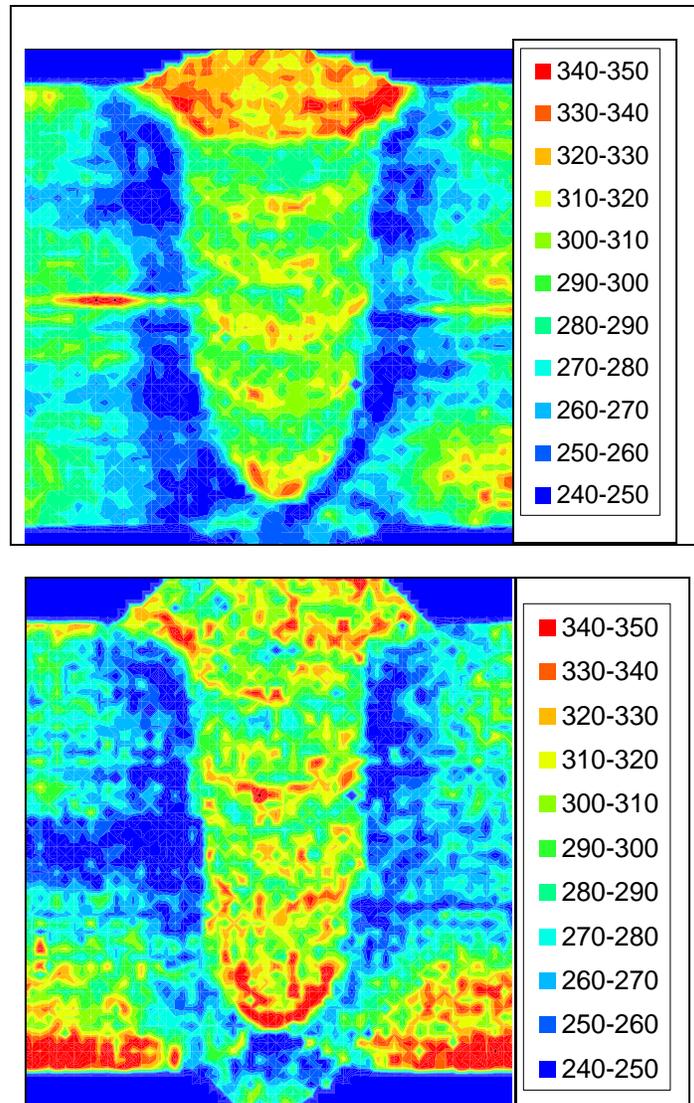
Hardness maps of single-torch (top) and dual-torch (bottom) welds [5]. Scale unit = VHN_{300} .
